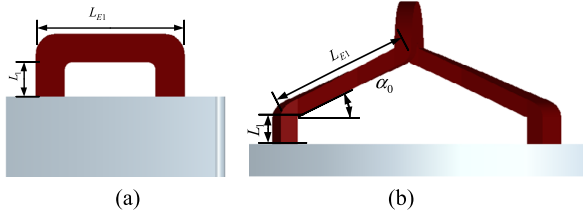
The 3-D model of end windings (a) ISNCW machine (b) ISOW machine.
